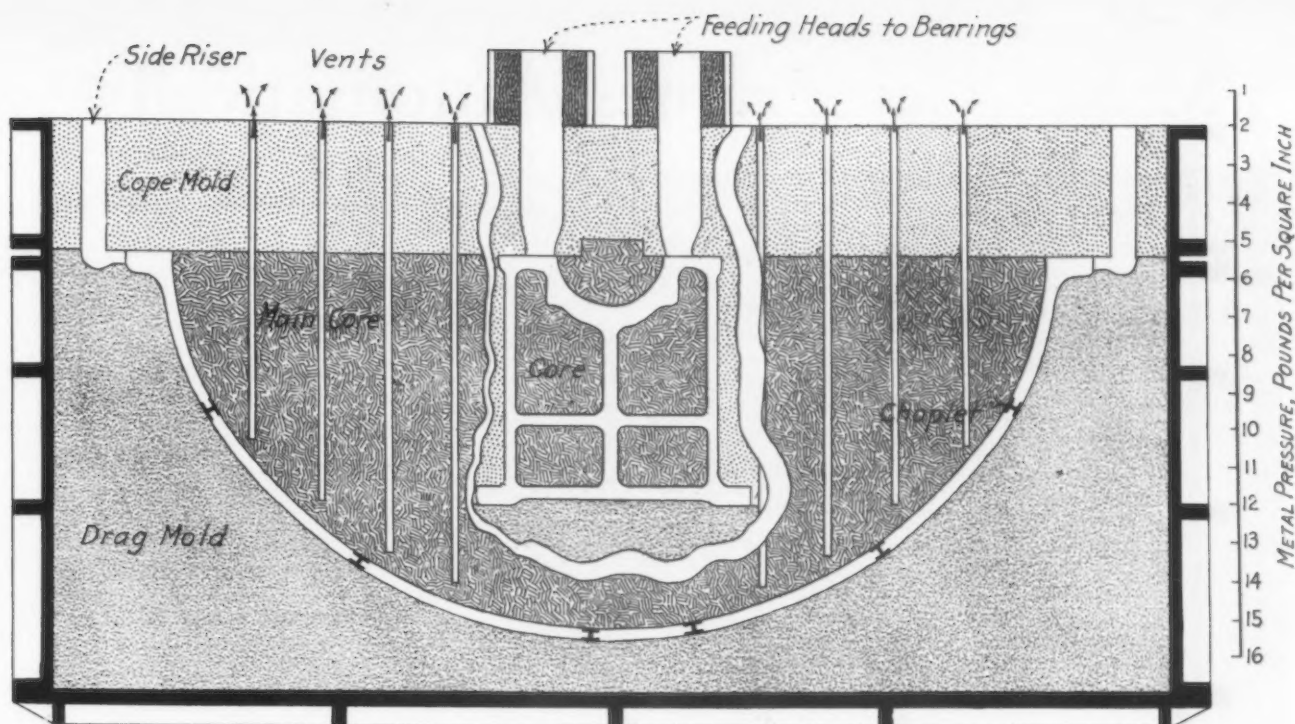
Correct Method of Molding the Turbine Casing. With the flange placed upward, the defects forming, from whatever cause, will segregate themselves there. Extra thickness, to permit planing them off, may be allowed and welding will readily repair any holes remaining at that point
